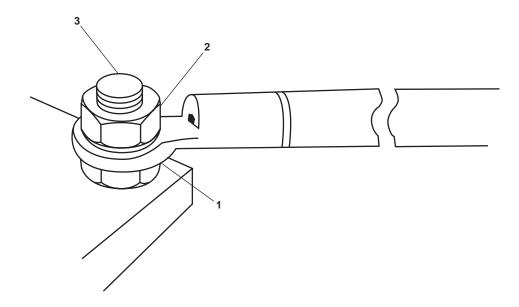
Electrical Wiring To The Controller Terminal (Typical)
